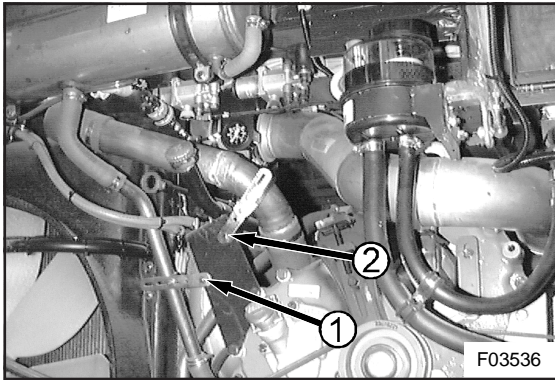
Support bracket retaining screws of the surge tank filler tube (1) and radiator inlet tube (2)
